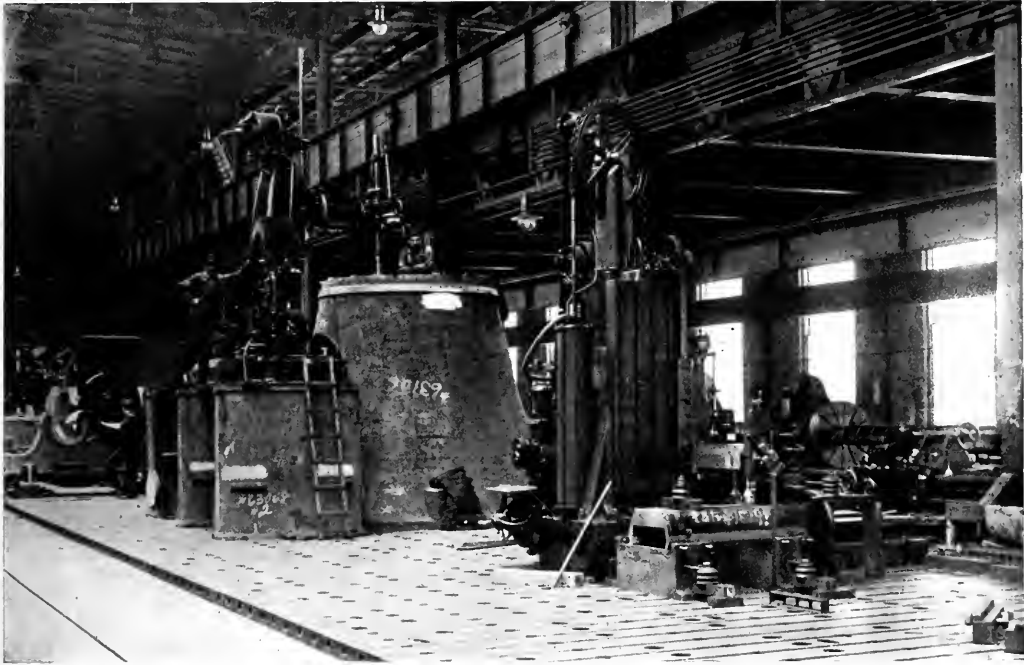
ARC LIGHTS FOR TROLLEY AND CRANES. FLOOR PLATE WITH PORTABLE TOOLS IN MACHINE SHOP.
